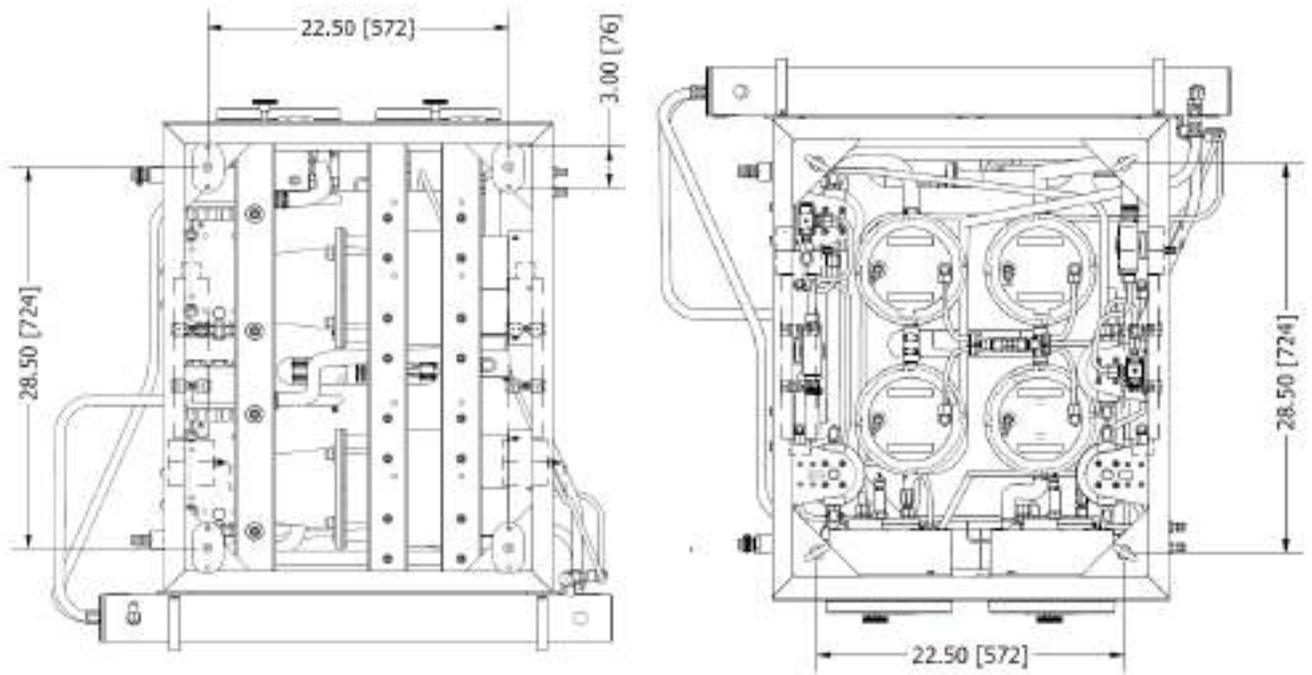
Mounting and Lifting lugs Dimensions of RO System
